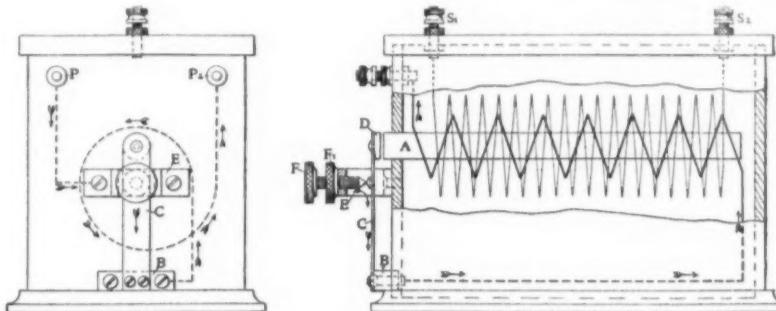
END ELEVATION AND SIDE ELEVATION OF SPARK COIL.
